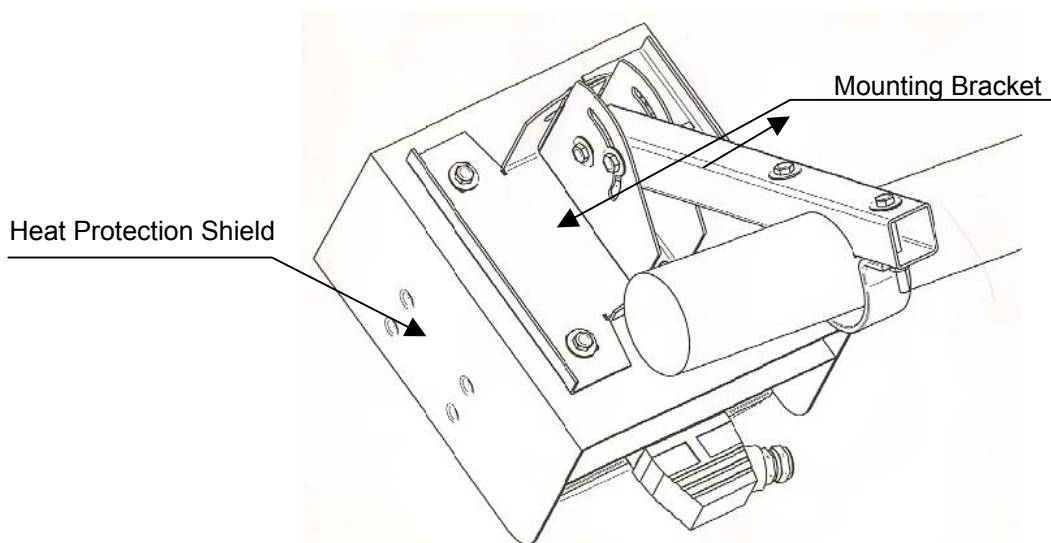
Optional Universal-Mounting bracket for MD 5850.
